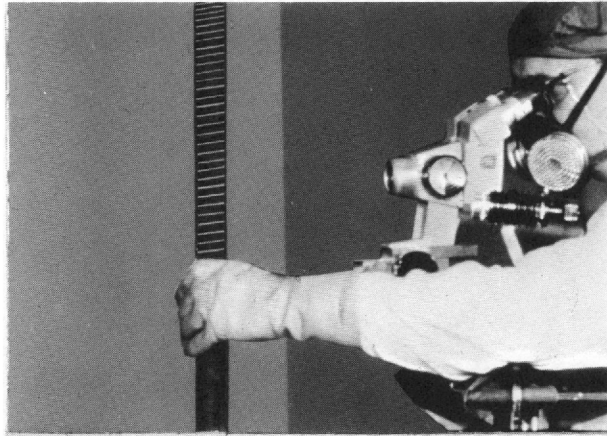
Lead Screw Inspection Using the Cycloptic Microscope.
